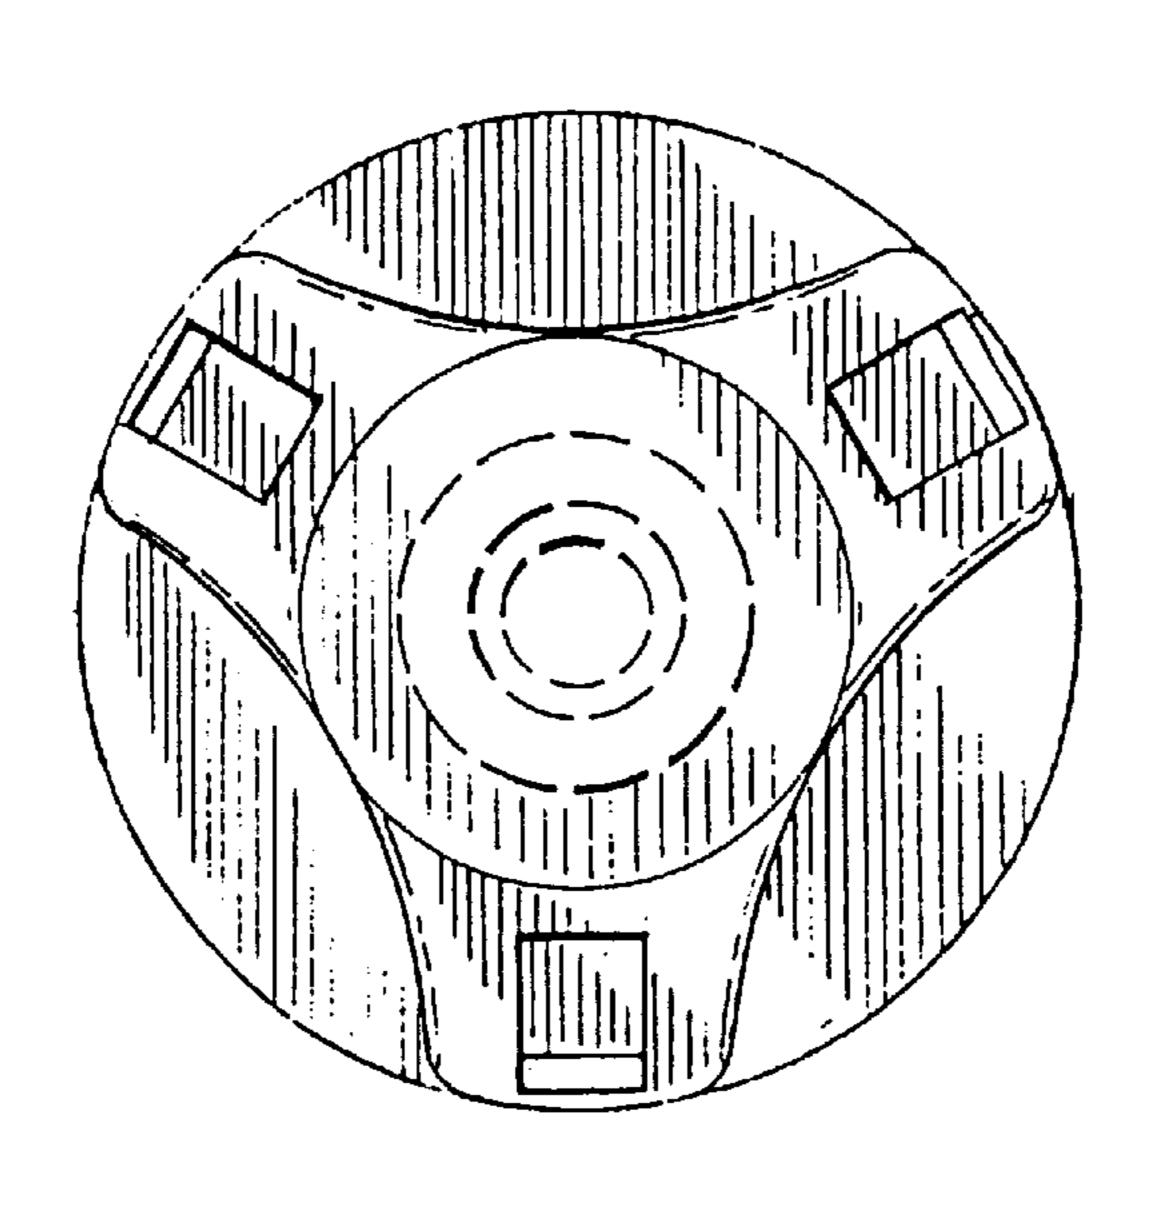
is another side view of the multi-lobal rear chuck sleeve as illustrated in FIG. 1.
